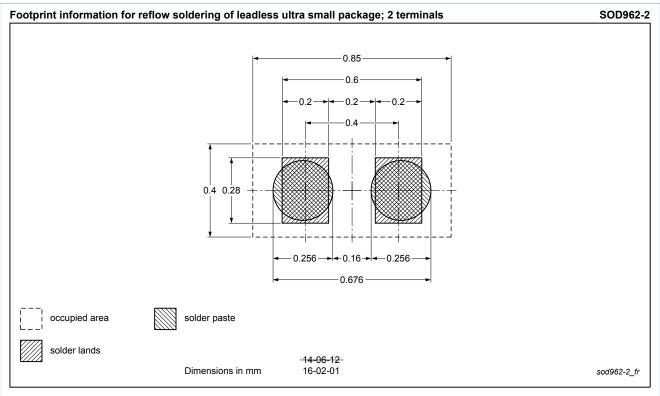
Reflow soldering footprint for DSN0603-2 (SOD962-2)
